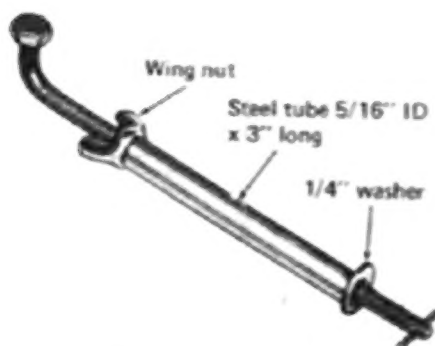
View showing locating bolt for adjusting the drop poppet valve.
